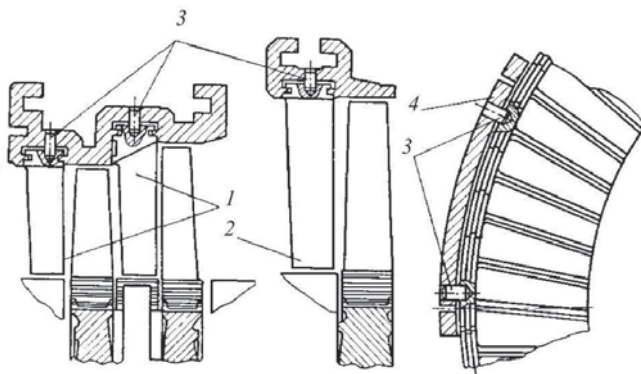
Nozzle vanes of the GT-700-5 engine:
